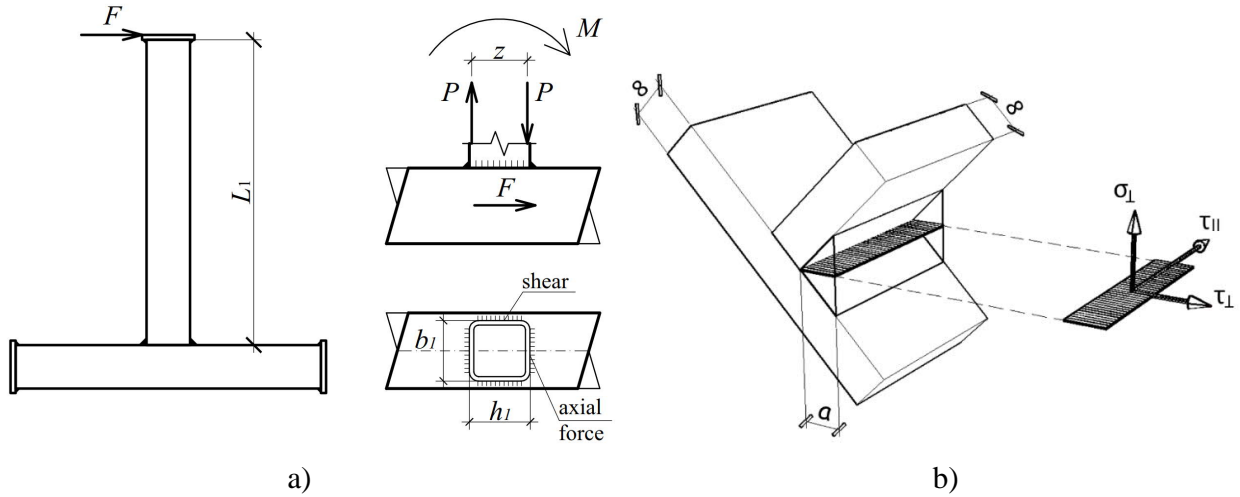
Design of welds: a) load components; b) stress components in weld.
